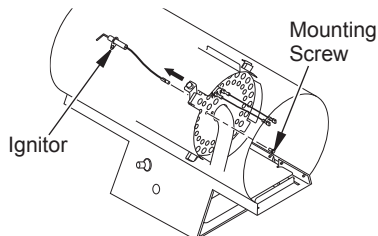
Removing Ignitor Mounting Screw and Ignitor
